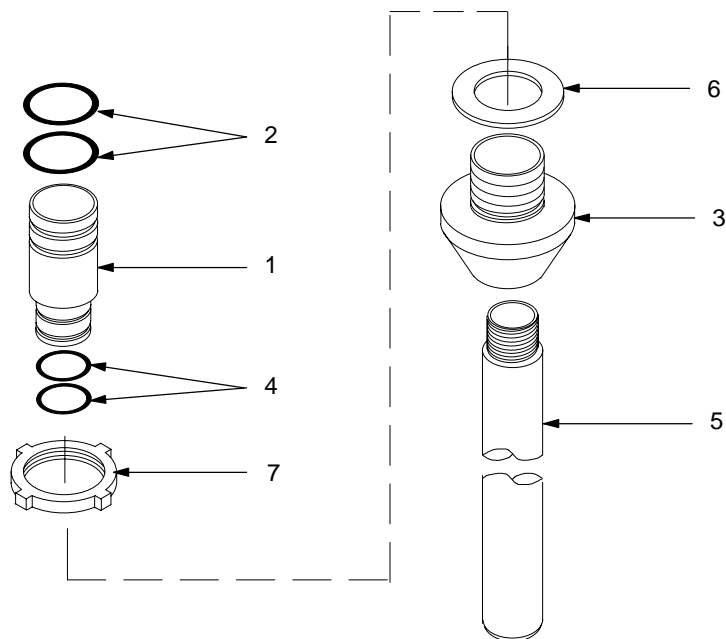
Pickup Tube and Pump Adapter for 80 lb Hoppers
